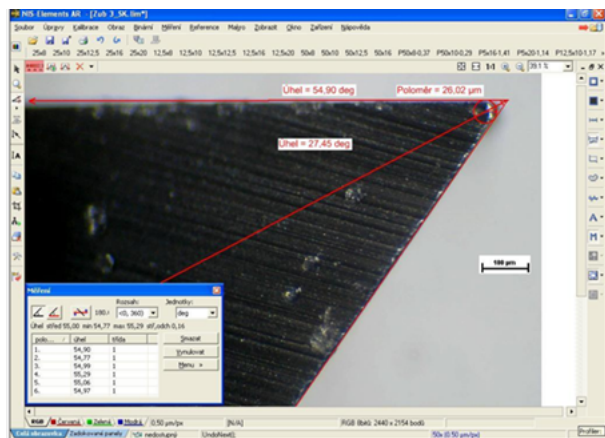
Wear of a cutting wedge - the alteration of the angle β - saw blade with sintered carbide plates
